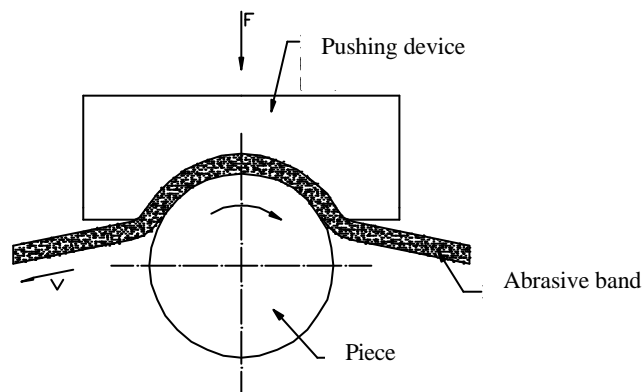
The polishing scheme using pushing device of band above the piece, ([1])
